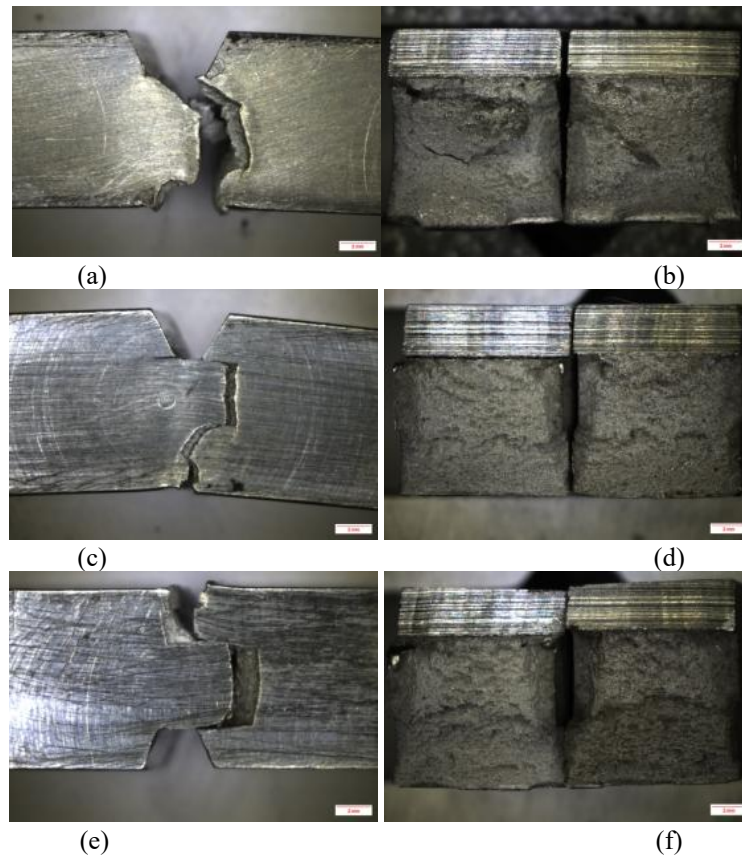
Fractographic appearance of the fracture surfaces of the impact specimens for alloy 2017, T451 condition + artificial aging at 190°C, different holding times: (a,b) - 1 hour; (c,d)- 12 hours; (e,f) - 24 hours; and different sections: (a, c, e) - longitudinal; (b,d,f) – transverse
